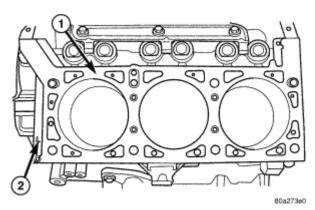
Cylinder Head Gasket Courtesy of CHRYSLER LLC
